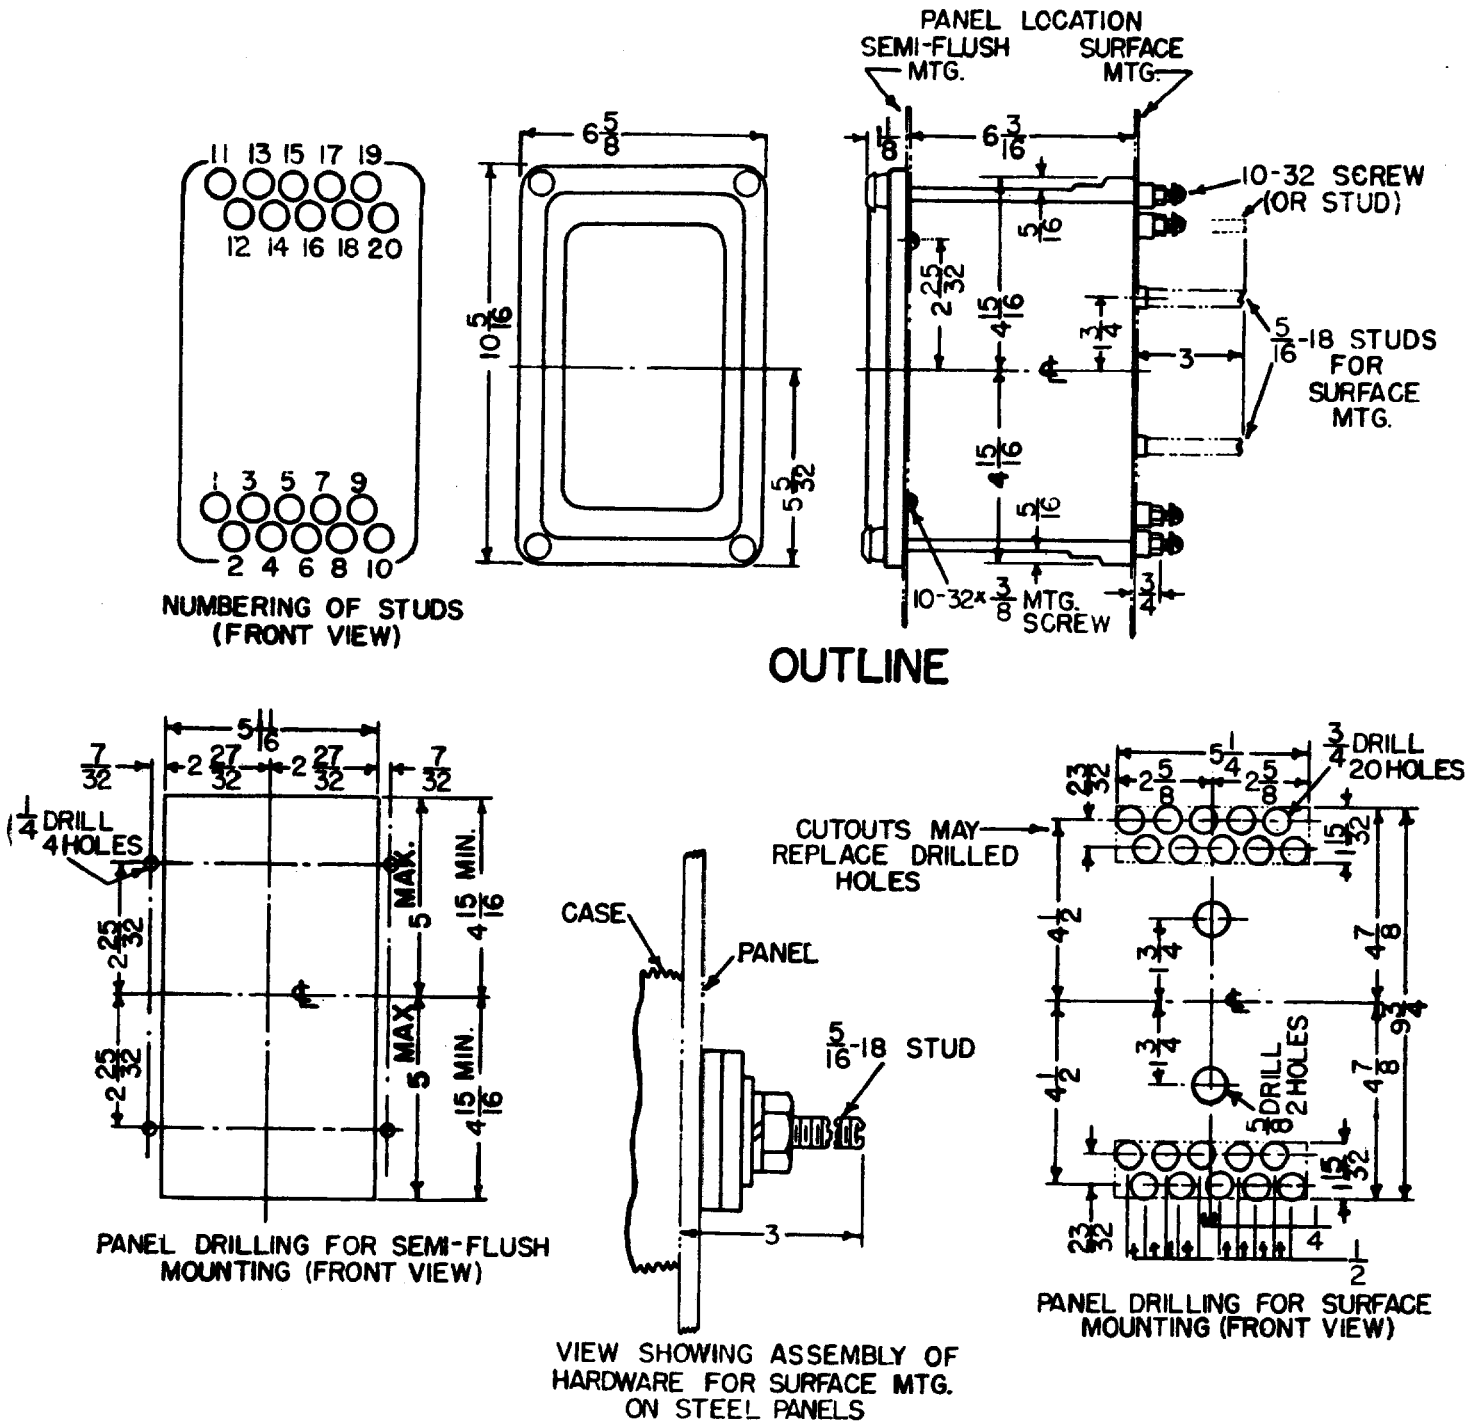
(K-6209272-2) Outline And Panel Drilling Dimensions Diagram For The S2 Case
